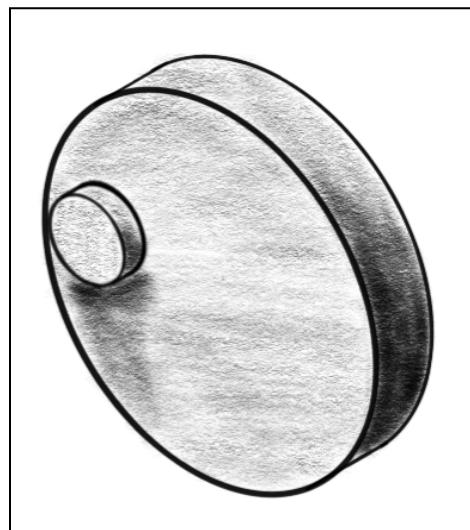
Original Scotch Yoke Pin and Circle Design Sketch
